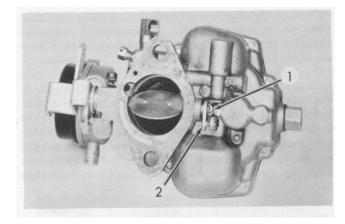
SCREW SHAFT ARM AND PIN ASSEMBLY
